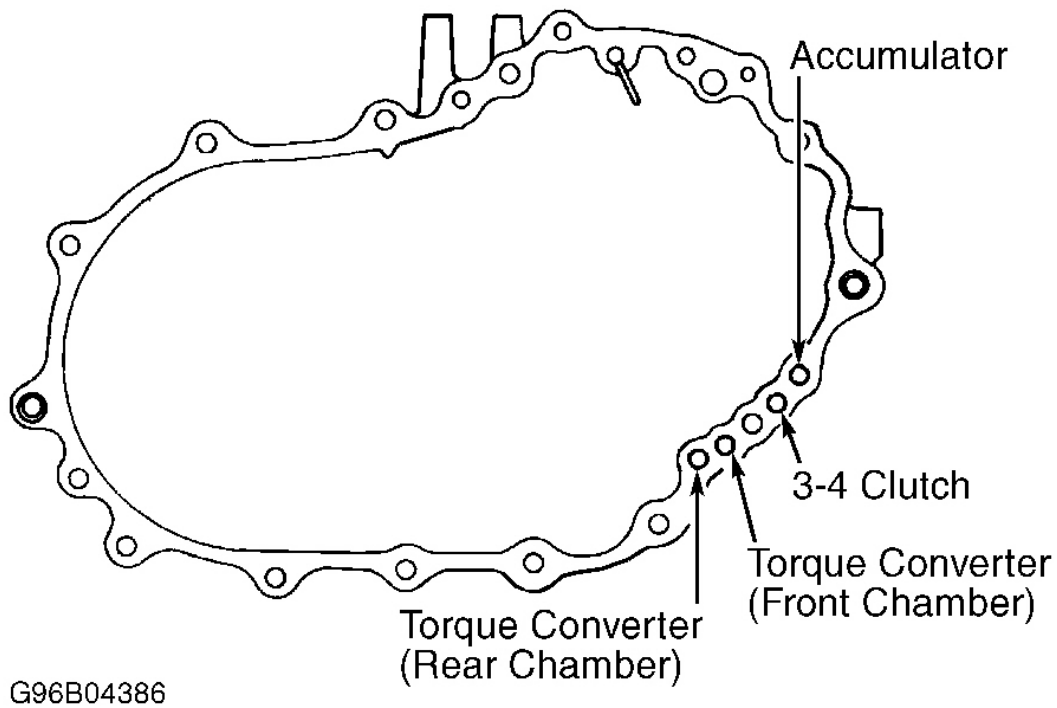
Identifying Oil Passages Transaxle Case-To-Converter Housing
